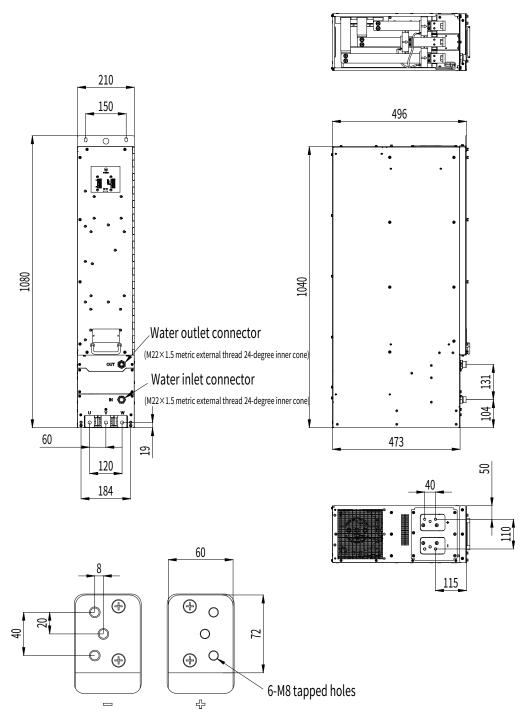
Installation dimensions of D3DLC water-cooled rectifier unit
